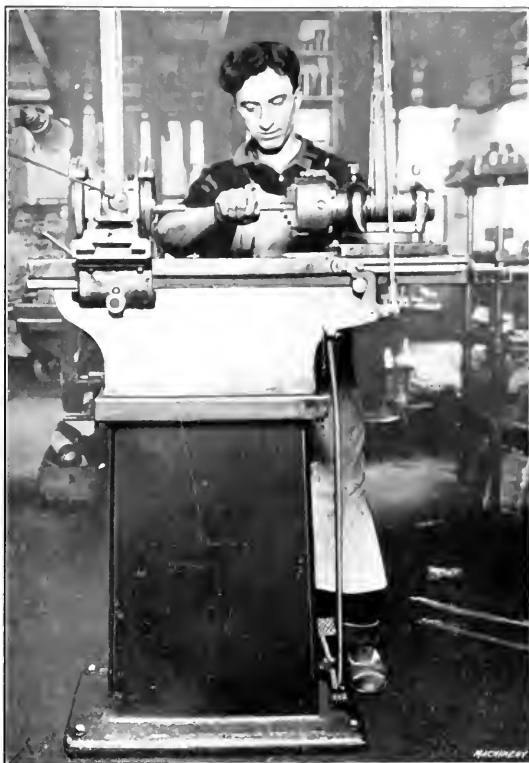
Rear View of "Capital" Internal Grinder, showing how the Work Chuck is stopped automatically
